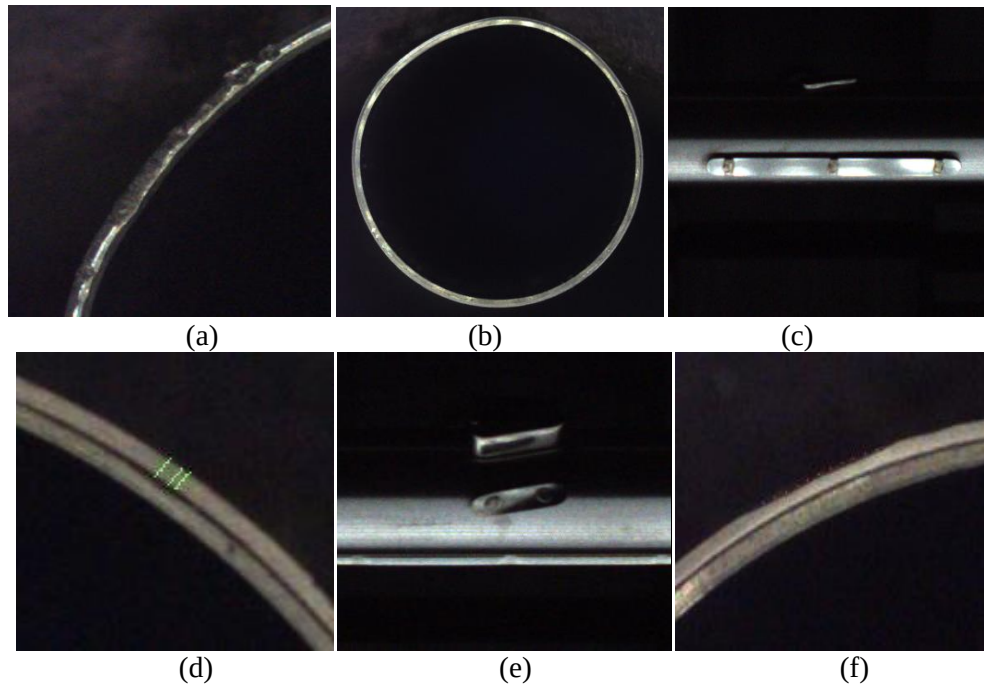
Typical tube defects captured in automatic vision based tube inspection system
